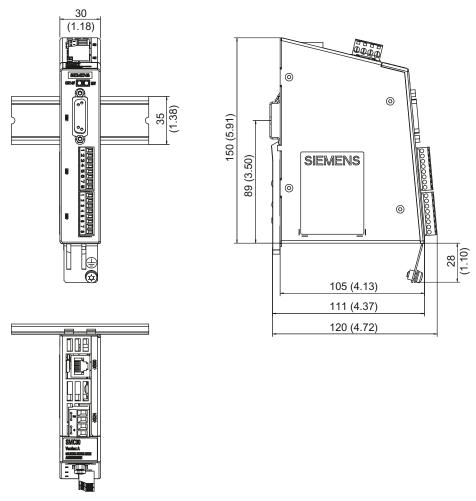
Dimension drawing of the Sensor Module Cabinet SMC30, all data in mm and (inches)
